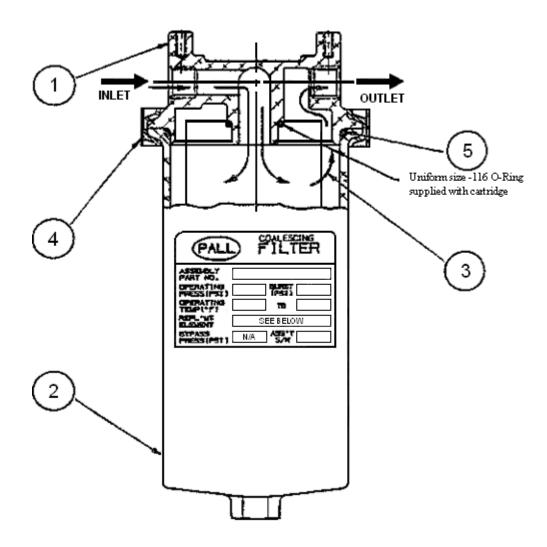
PD-00946-SU80 [G] B Coalescing Filter Assembly
